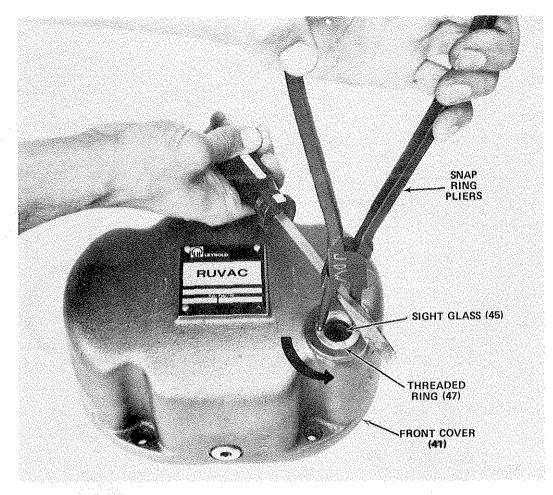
Using Snap Ring Pliers to Remove the Oil-Level Sight-Glass Assembly from the Front Cover (WA-250 pump model shown).
